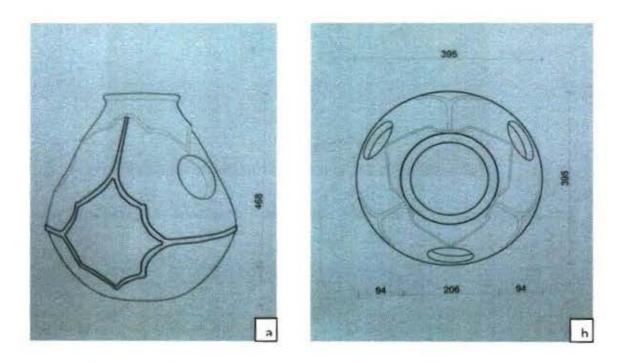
Dimensional drawing of the top wine pot showing the side view and the top view -Researcher's drawing.
